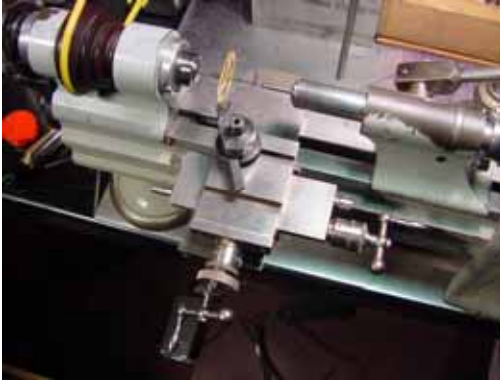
Tipping the escape wheel teeth with a screw feed cross-slide.
